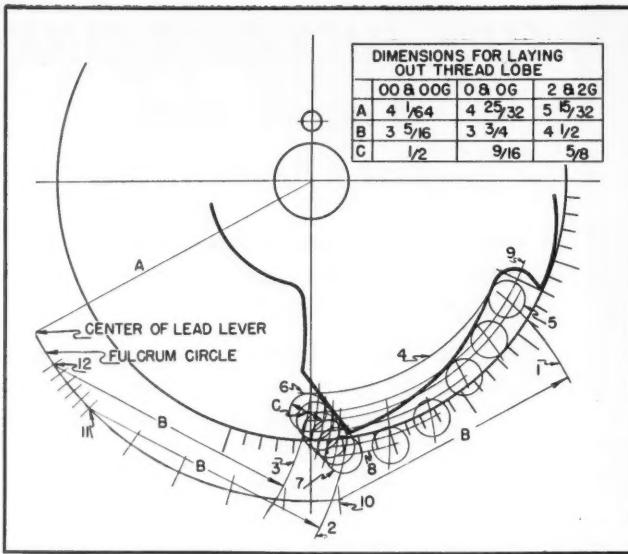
Drawing Illustrating the Development of the Lobe Which Is Required for the Threading Operation
